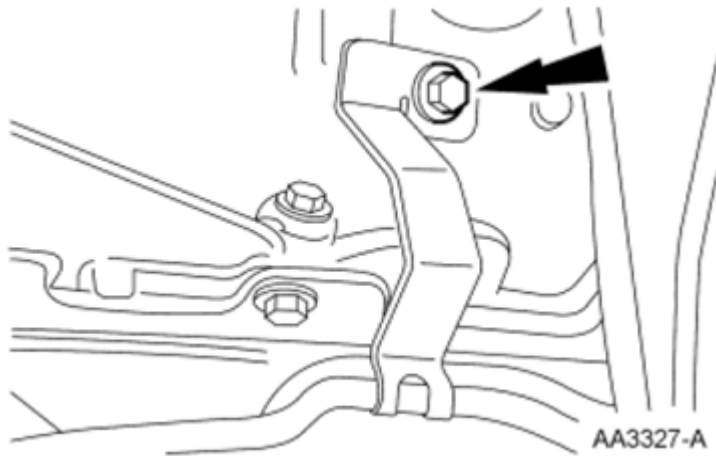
Locating Transmission Oil Cooler Tube Bracket Bolt
